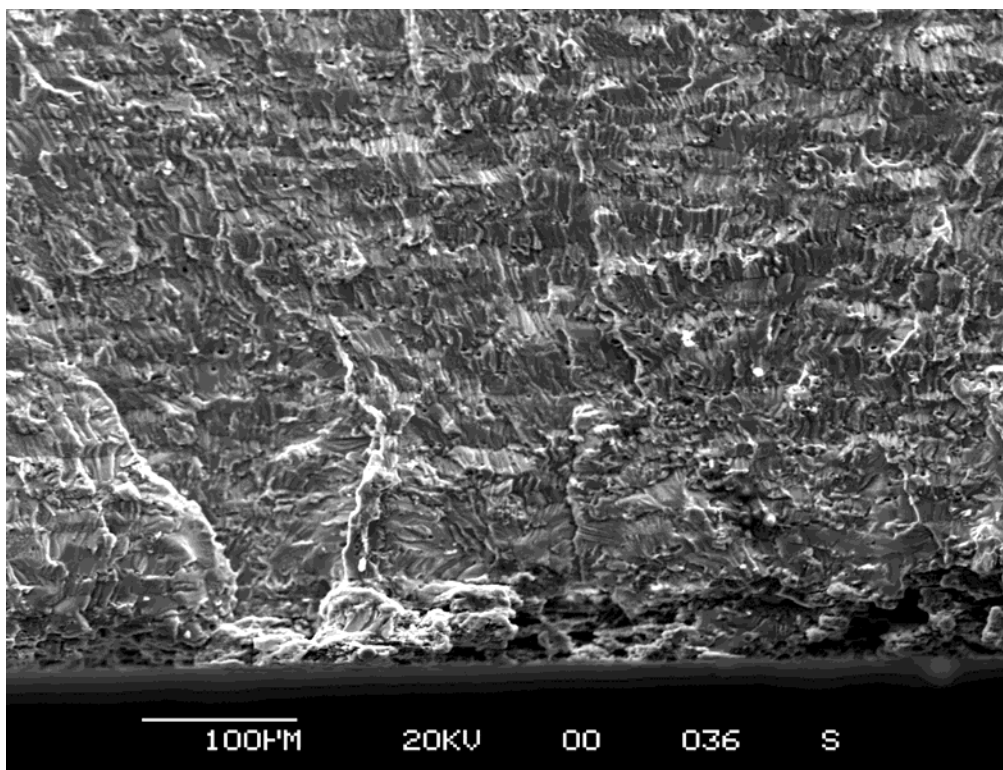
Crack Origin A (Fig. B-34) on Fracture Surface of Specimen 5877.
